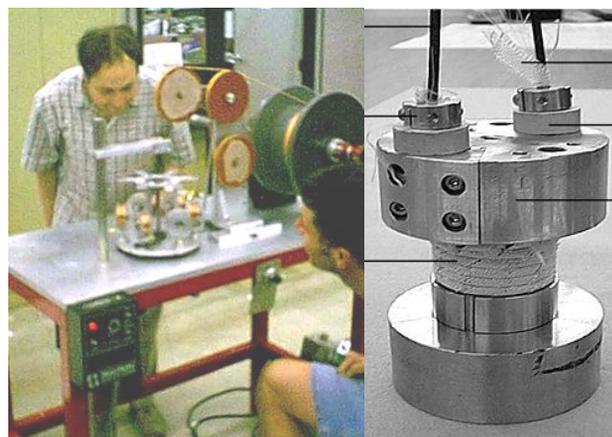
Fabrication and testing of structured cable: a) 6-on-1 cabling of strands onto spring tube; b) test fixture with 2.5 cm diameter winding of structured cable.
